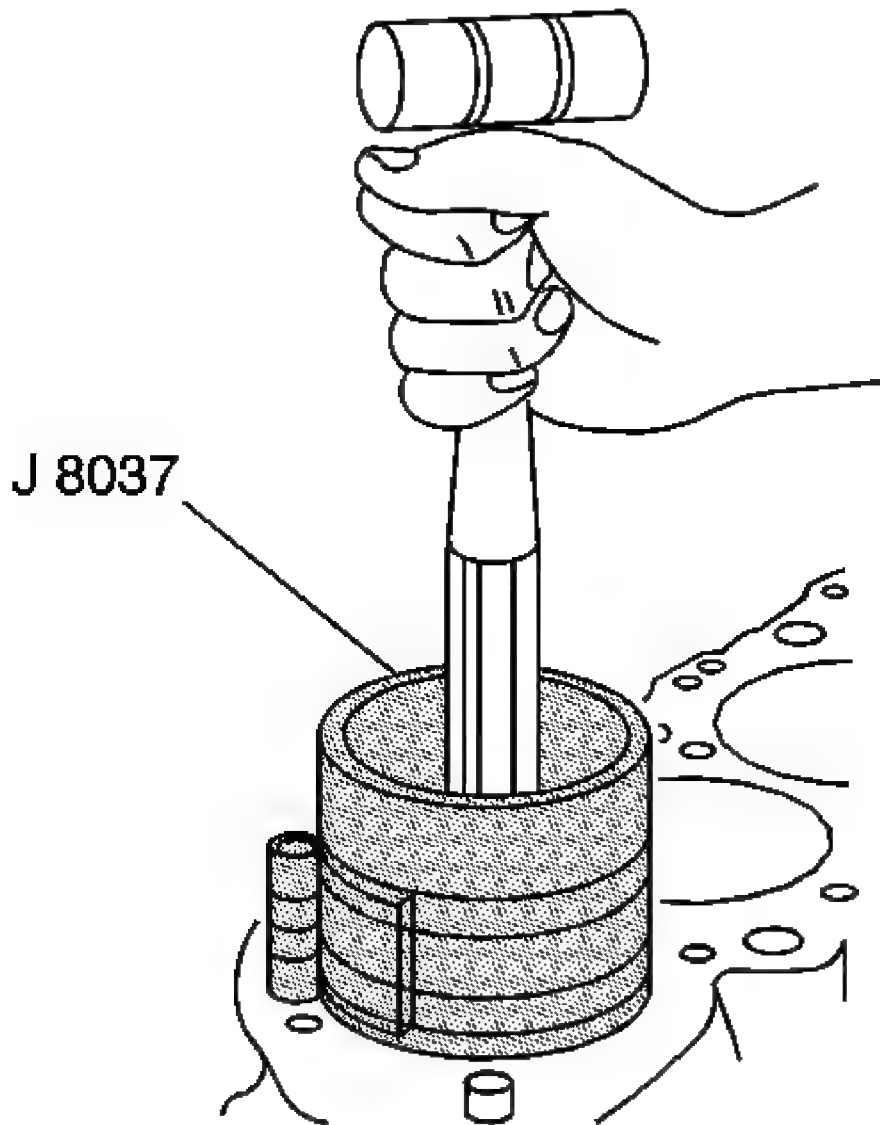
Installing Piston & Connecting Rod Assembly Into Engine
